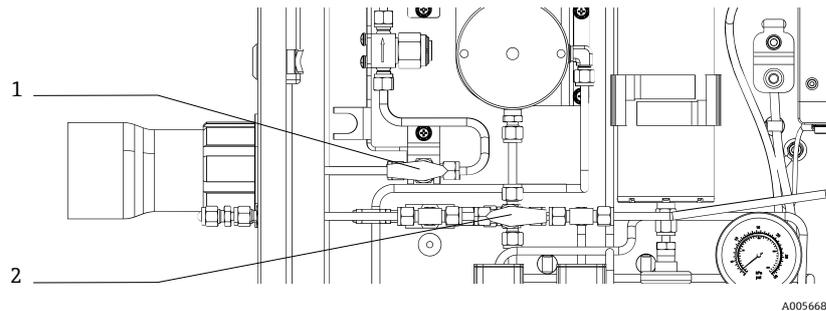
Inlet shutoff valve (1) and sample vent valve (2) in the JT33 sample conditioning system filtration assembly
